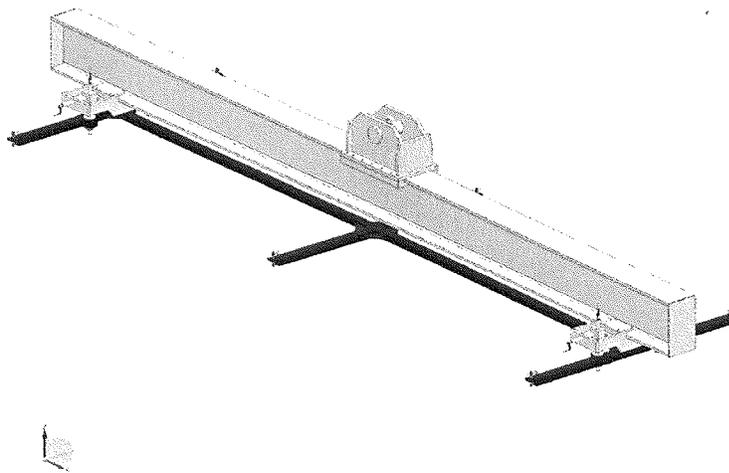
Use of 10-ton strongback lifting fixture to remove the upper truss frame.
